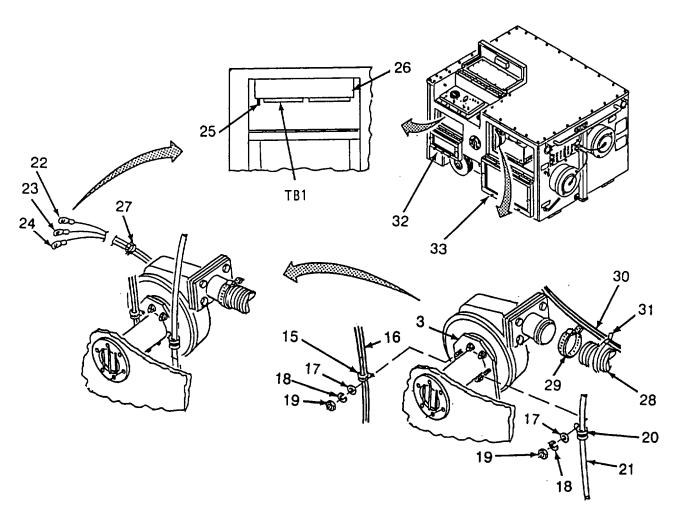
Combustor Fan Assembly Installation (Sheet 2 of 2)
